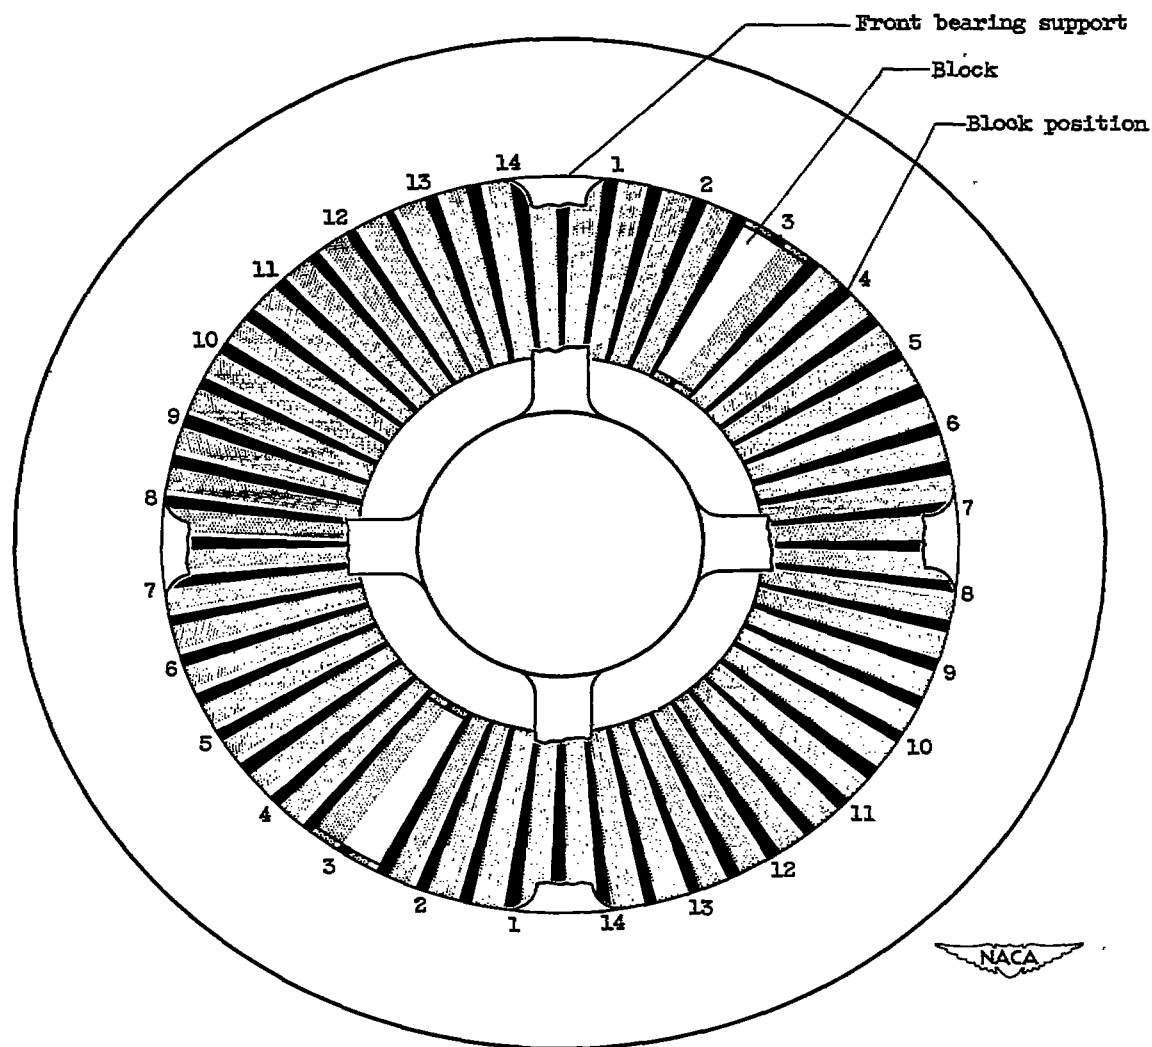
Inlet of experimental compressor showing positions of blocked passages.
